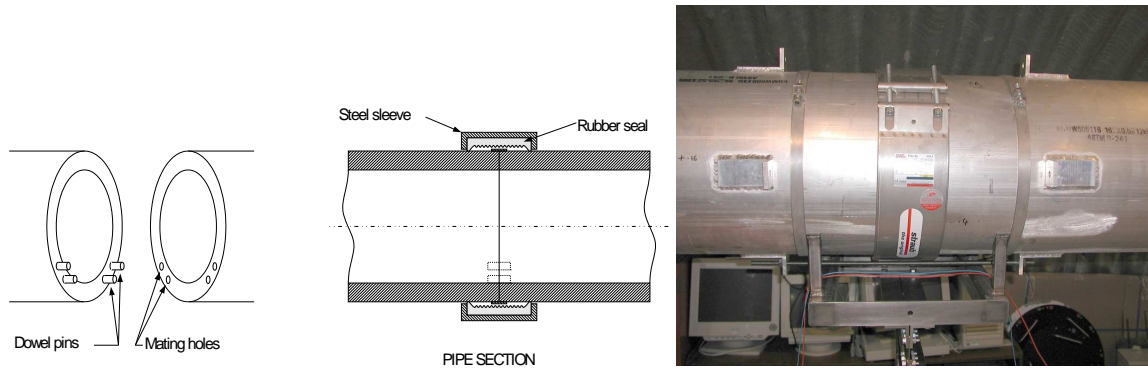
Sketch of the pipe coupling scheme (left) and photo of the assembled joint (right). In the photo there is a drawbolt in the lower flanges only.
